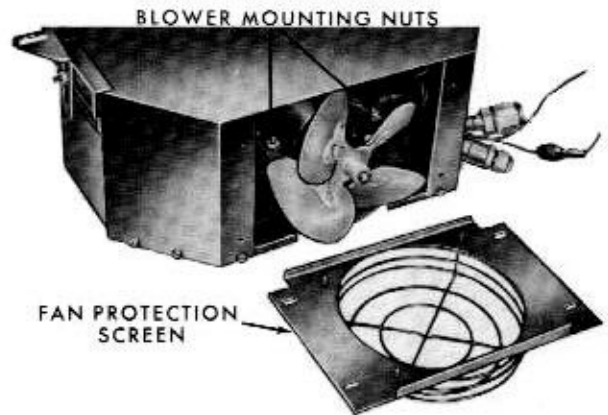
A-5—Blower Motor Mounting—(61CT-8805)
